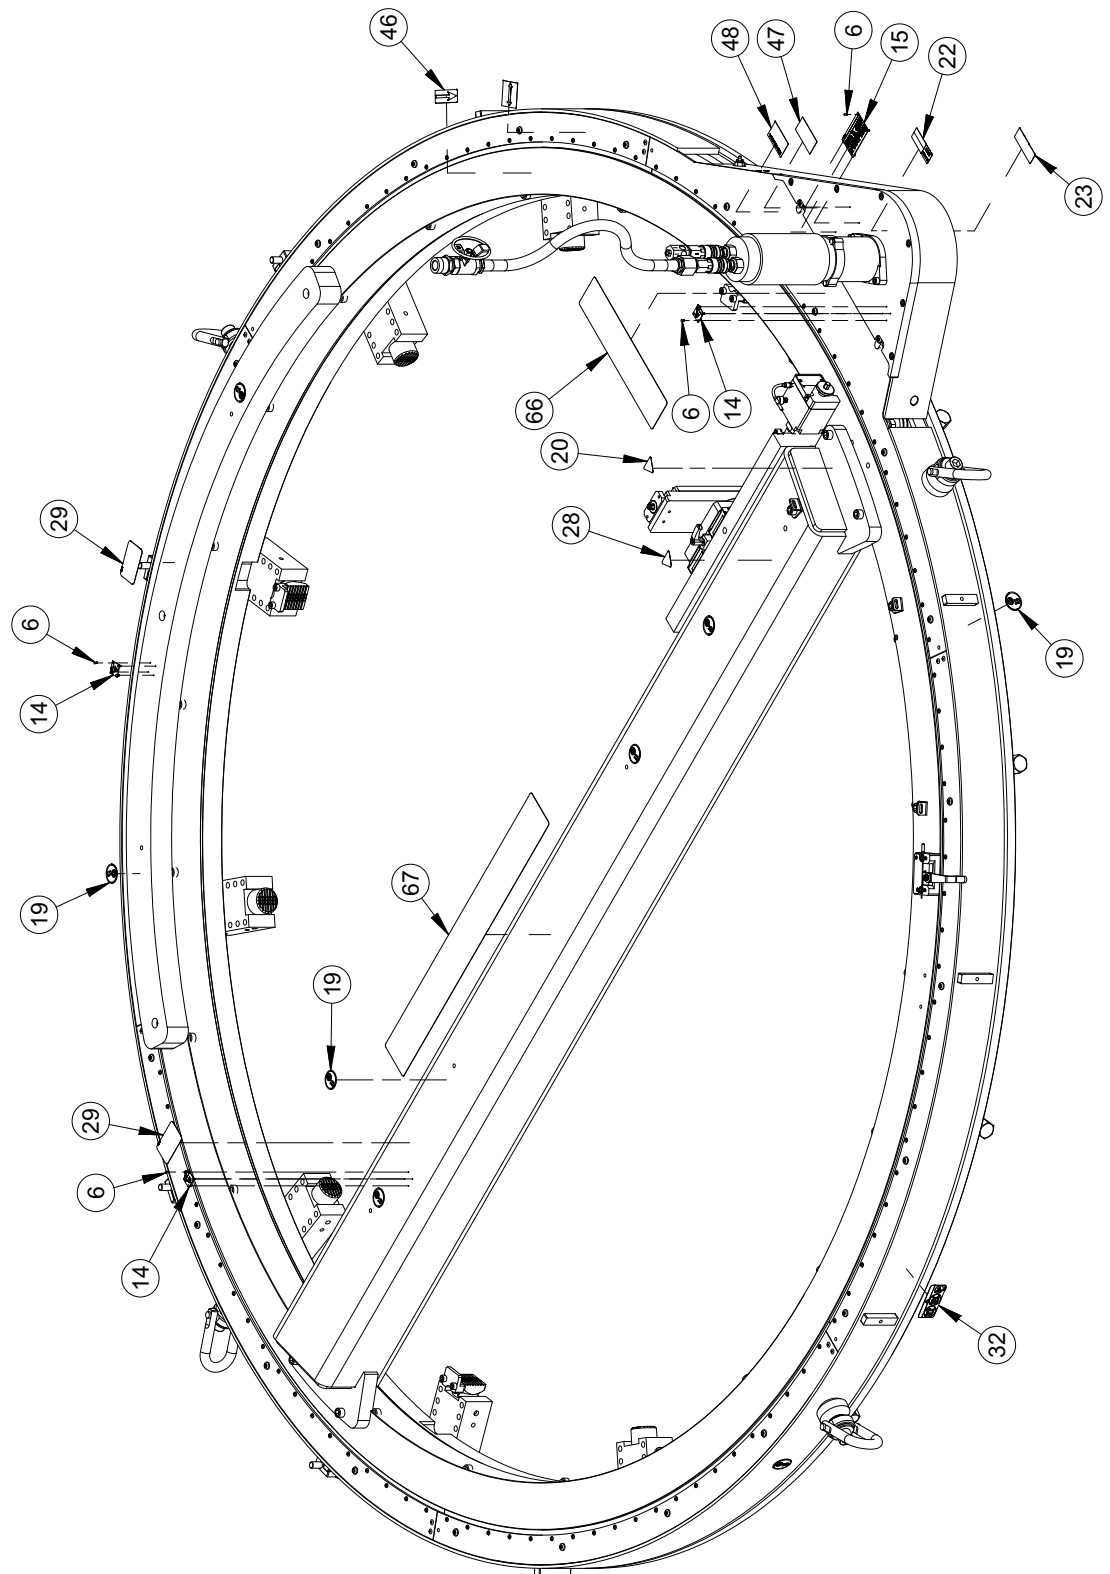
ODF100 SPEED FACER LABEL LOCATIONS (P/N 94790)
